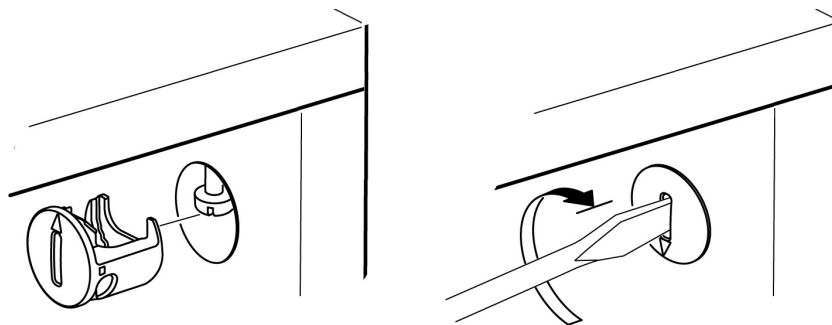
Cam-and-bolt corner-joint for furniture made from particle boards - Modern furniture is typically assembled with mechanical fasteners, rather than Integral Mechanical Attachment (Figure taken from the BILLY cabinet assembly instructions, ©IKEA of Sweden)
